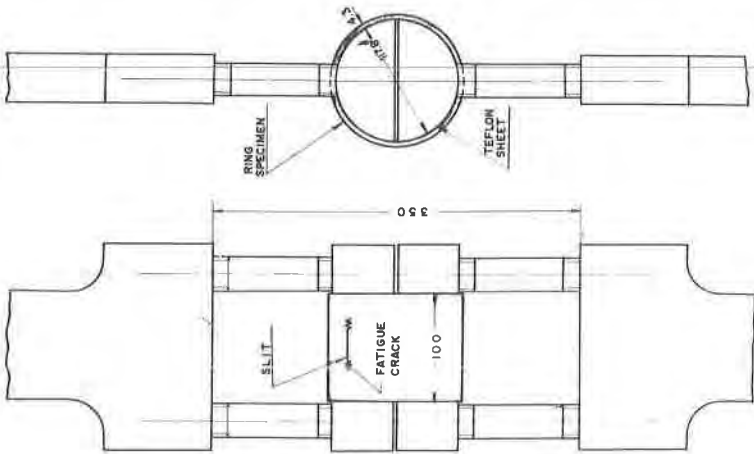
Construction of Specimen Assembly for Ring Tensile Test
